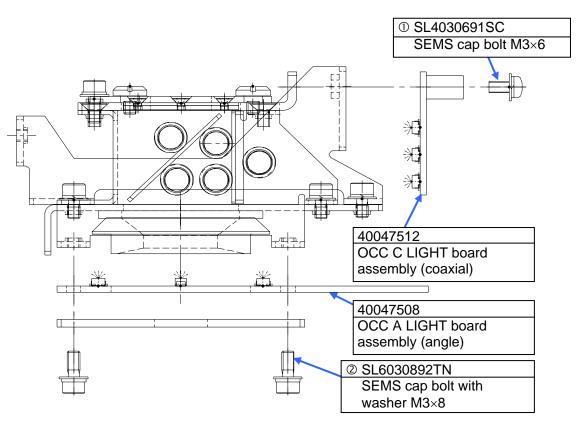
Replacing the OCC Coaxial/Angle Light Board Assembly
